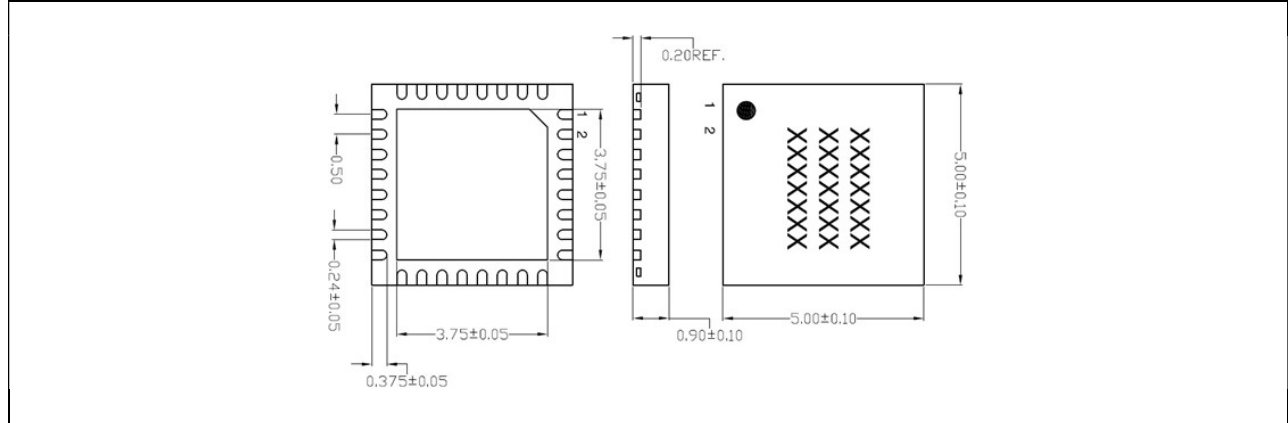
Outline Dimensions of QFN32 Package with Exposed Pad
